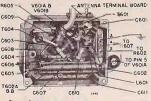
Bottom View of FM Tuner Sub-chassis. Location of components shown.
